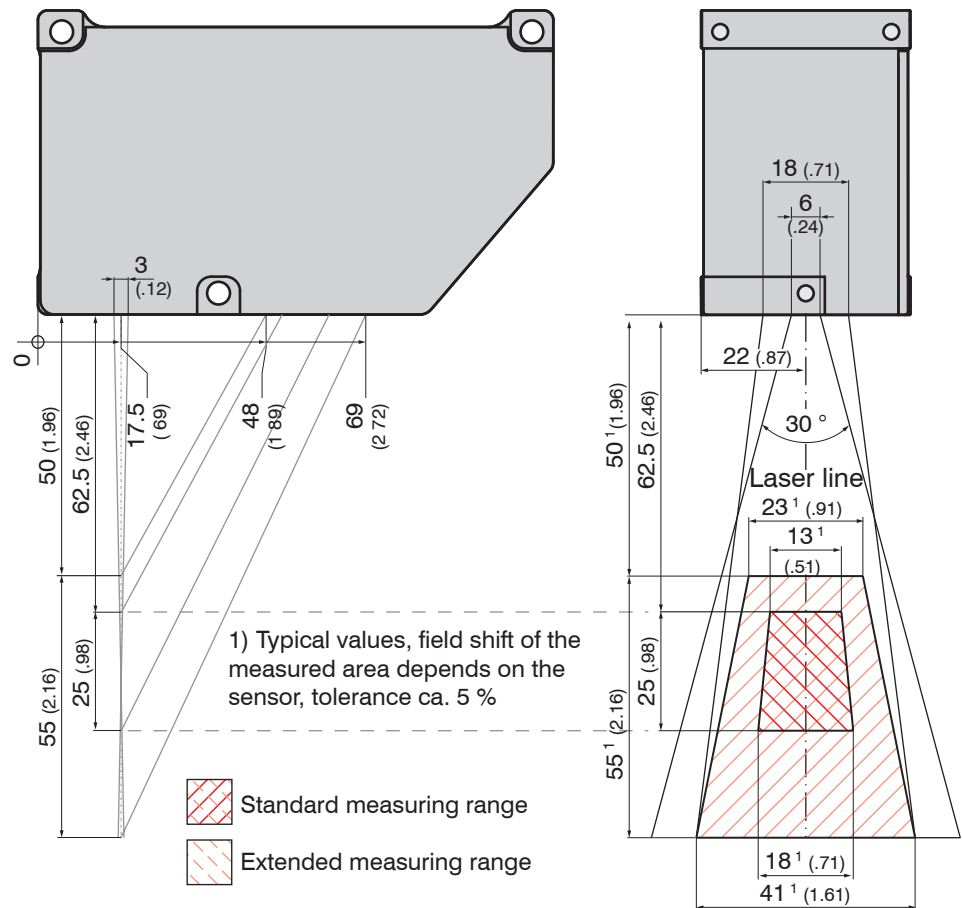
Measuring field assignment LLT 28x0-25, dimensions in mm (inches), not to scale
